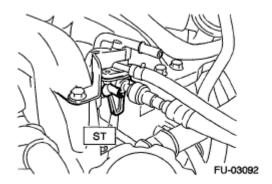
Attaching ST To Fuel Return Pipe Courtesy of SUBARU OF AMERICA, INC.
